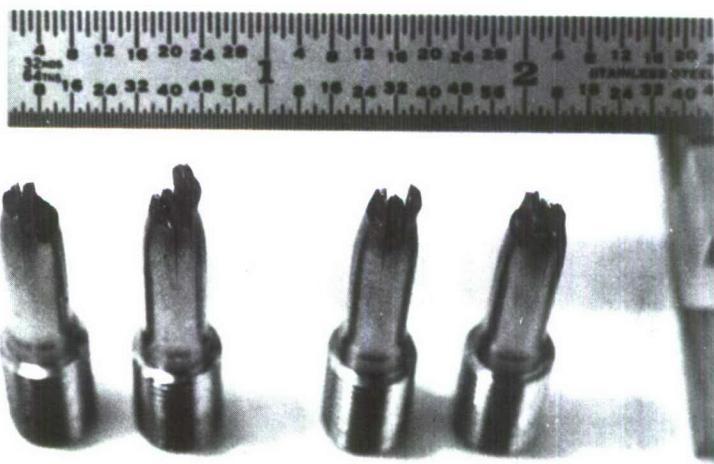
Fractured Tensile Specimens. Right: Axial direction, -65°F test temperature, removed from 0.4-inch-thick section. Left: Axial direction, -65°F test temperature, removed from 0.4-inch-thick section.
